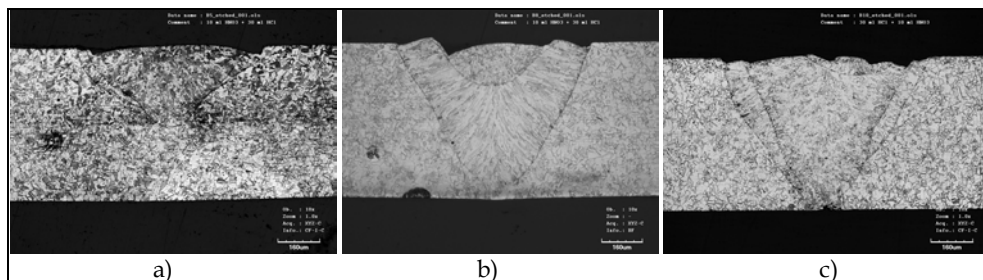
Perpendicular cross sections of welds at a) 3.8 J, b) 4.7 J and c) 6.2 J.
